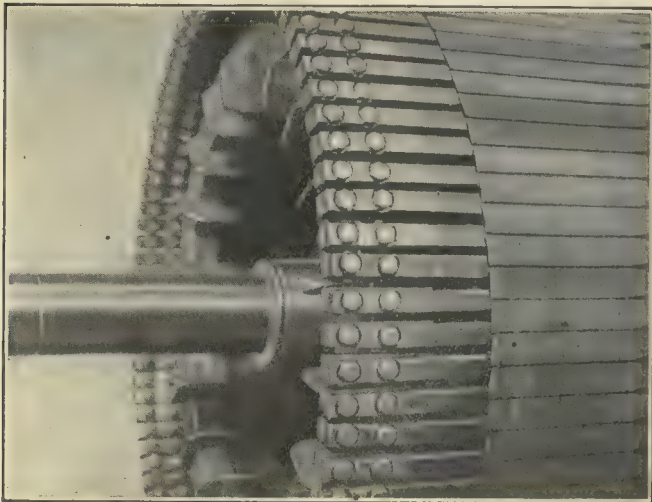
EARLY TYPE OF SQUIRREL-CAGE ROTOR, BARS AND END RING BOLTED TOGETHER
